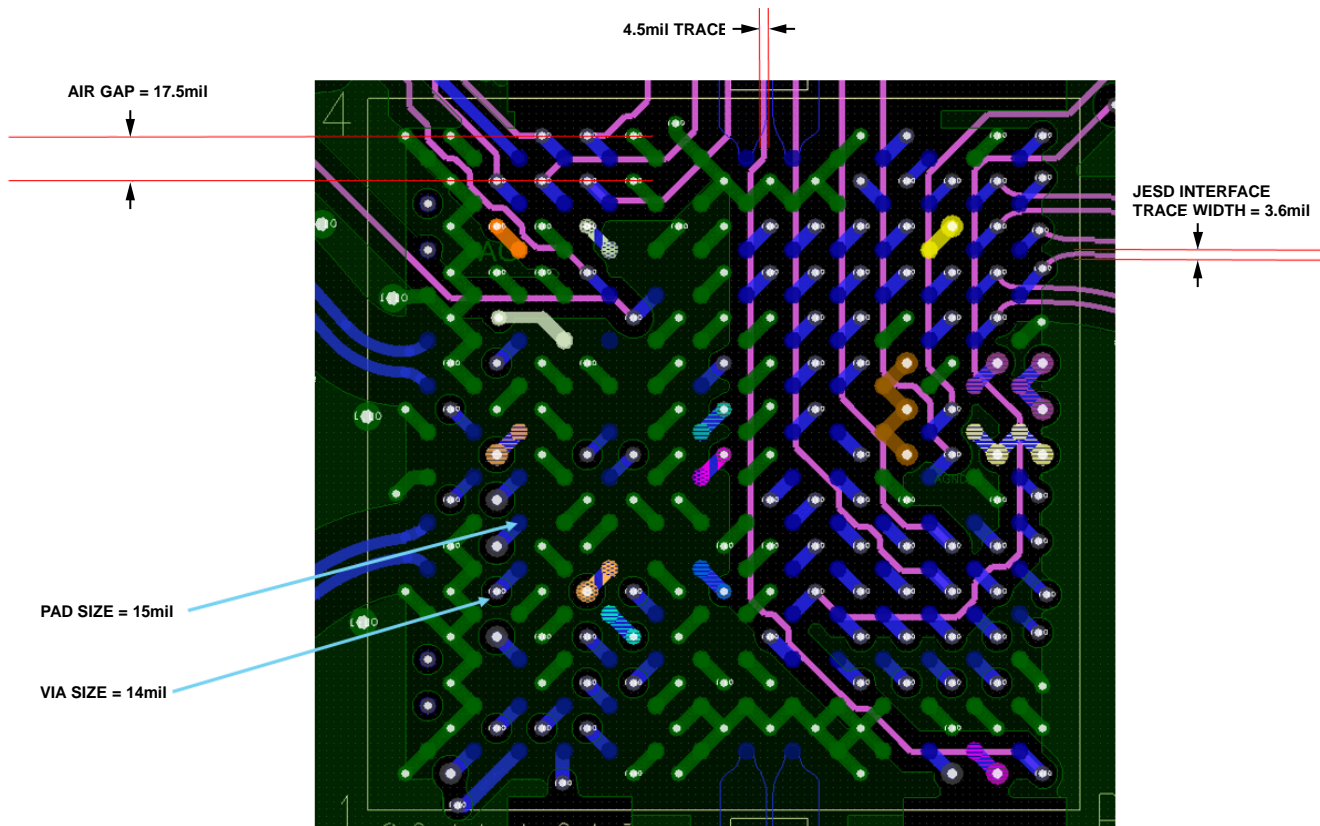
Trace Fanout Scheme on 8-2 Evaluation Card (PCB Layer Top and Layer 5 Enabled)
